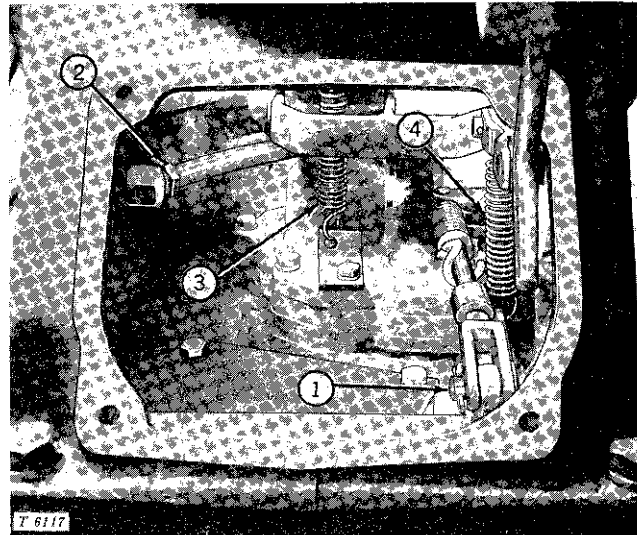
Disconnecting Oil Pump Line and Linkage (H-L-R)
